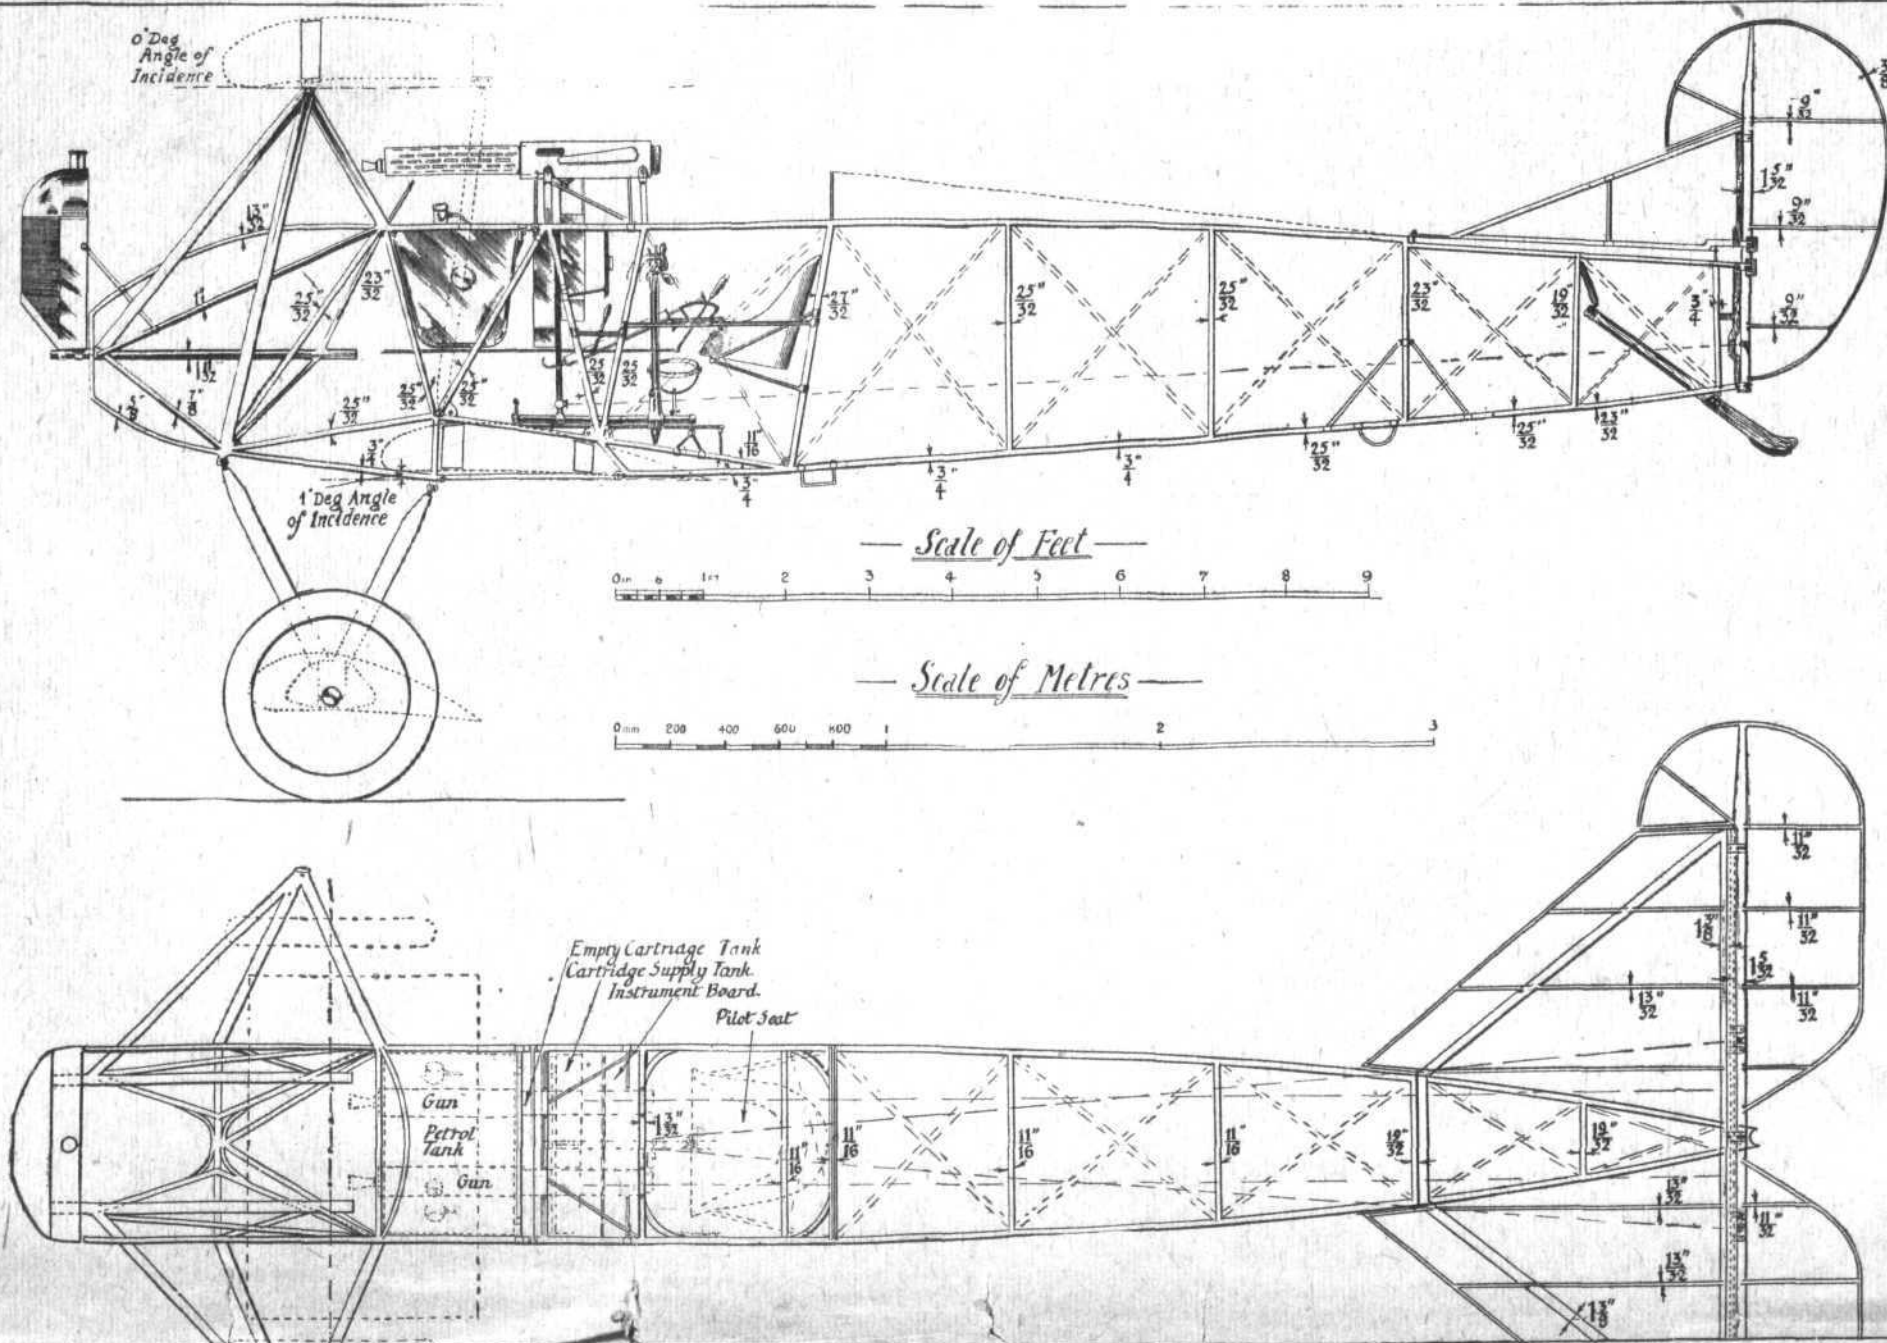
Side elevation and plan of the biplane. In the side elevation the tail plane has been omitted, and in the plan the rudder.
